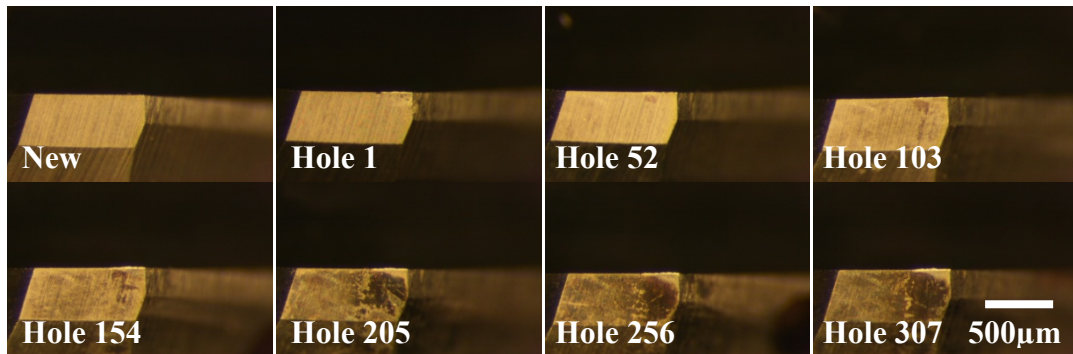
Tool wear micrographs of uncoated carbide reamer under 70bar through-hole cutting fluid, 32m/min cutting speed (Test 1)
